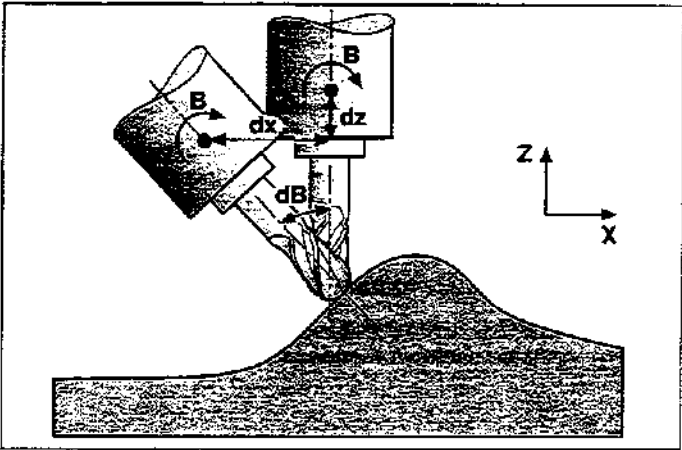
Offset of the tool datum for tilting the tool
